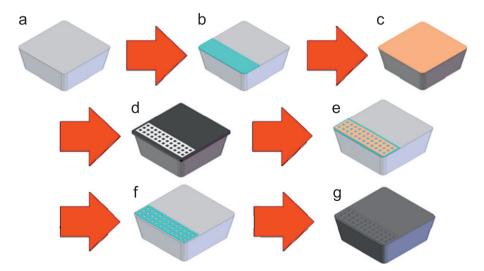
Schematic of the fabrication process of a DLC coated tool with micro-texture: (a) lapping and cleansing of rake face; (b) deposition of Ni; (c) spin-coating of photoresist; (d) UV exposure through a mask; (e) development; (f) chemical etching of Ni and (g) DLC coating.
